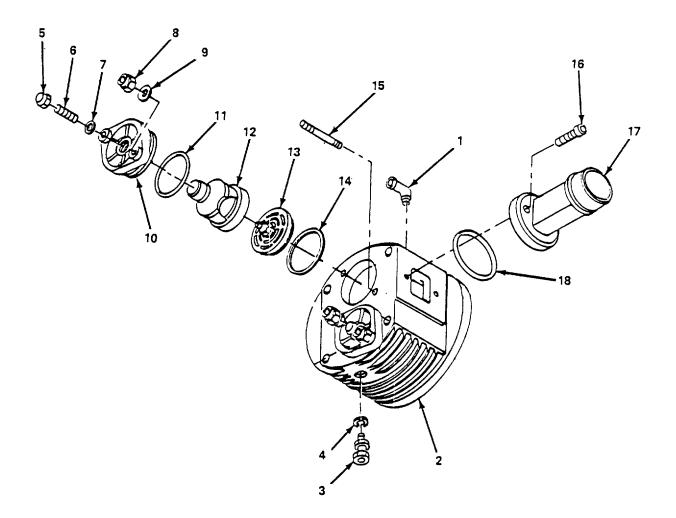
1st Stage Valve Head Assembly, Repair.
